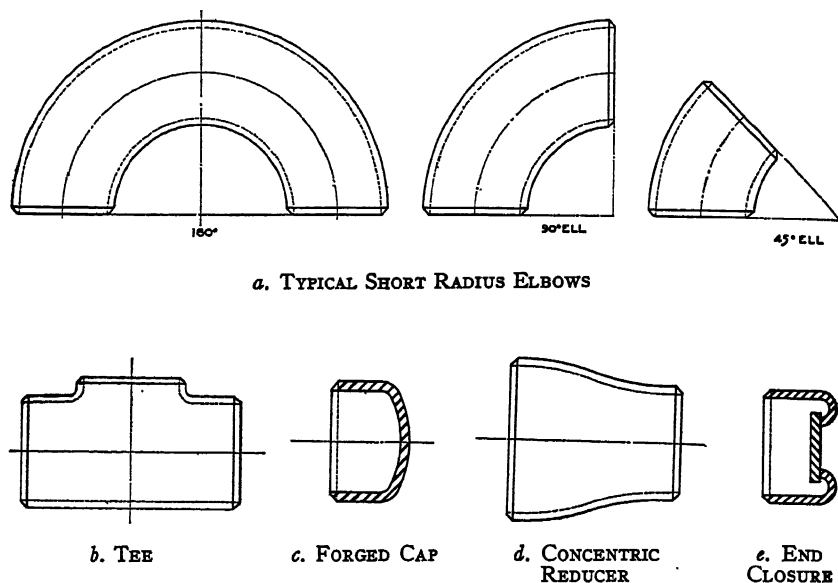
TYPICAL WELDING FITTINGS
